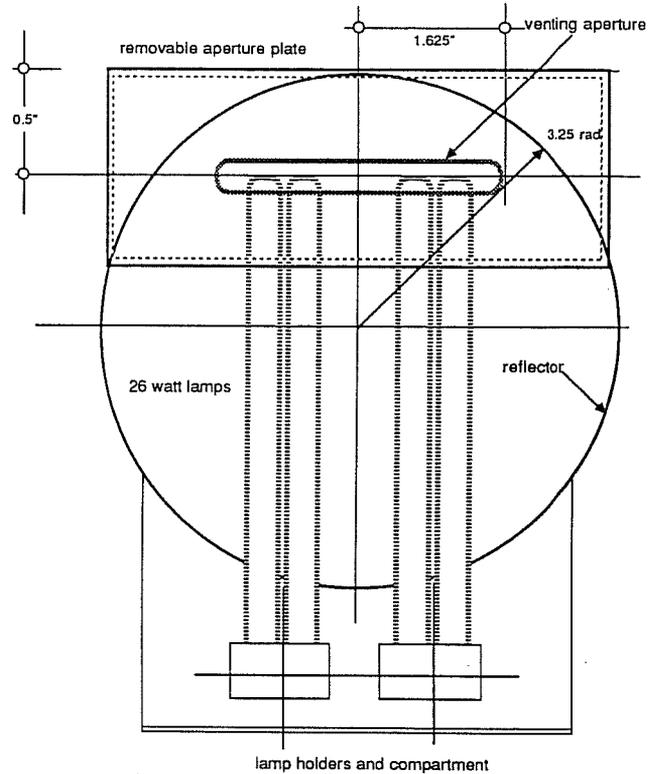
Top view of recessed fixture showing geometry of venting aperture plates relative to lamp geometry.
